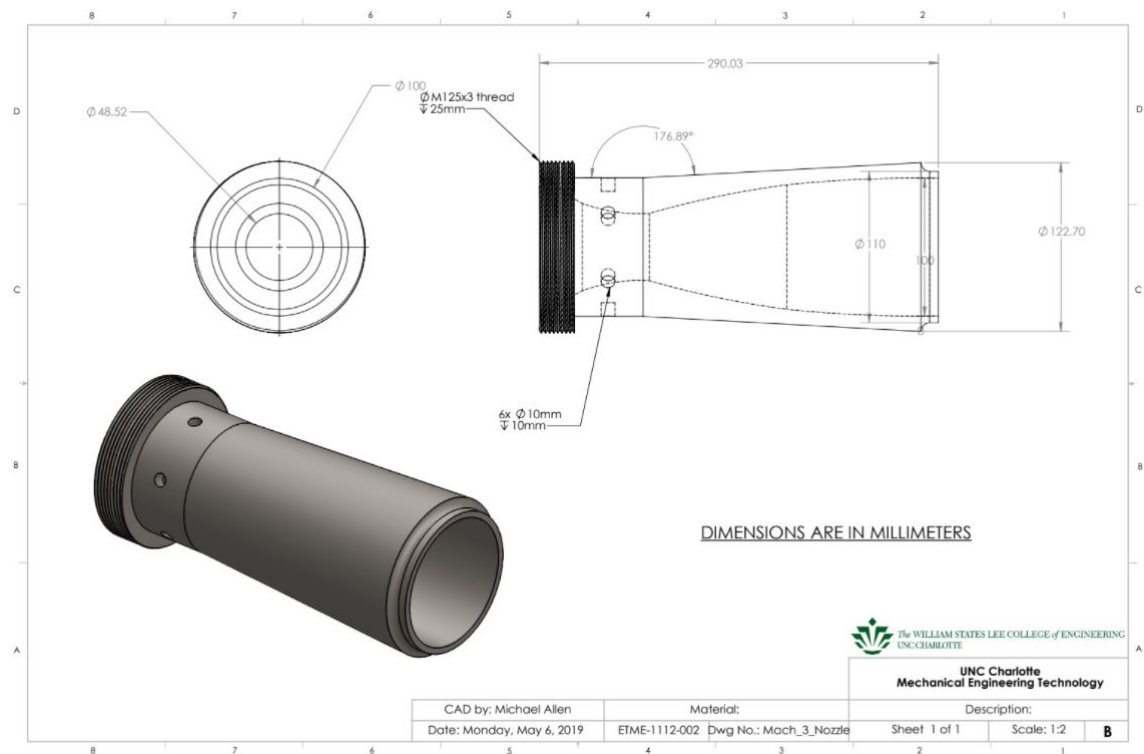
Drawing of the UNCC HSWT Mach 3 nozzle.
